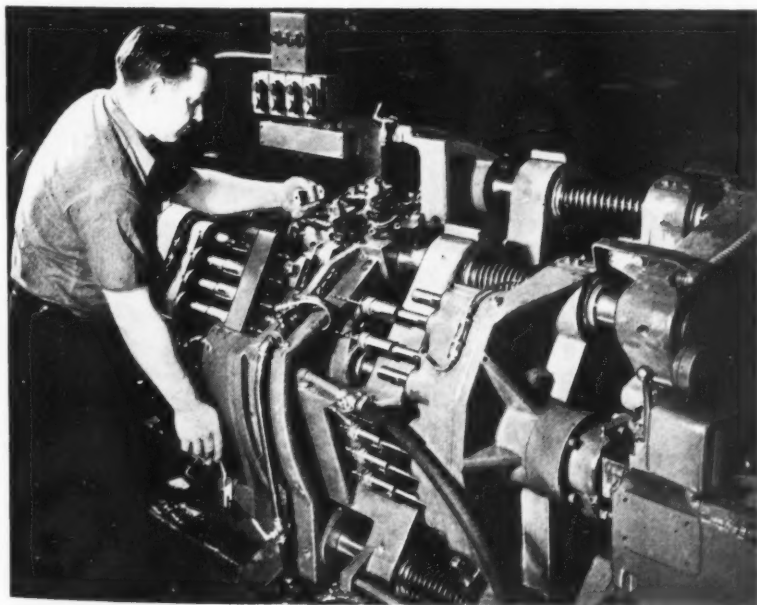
Double-end Hydraulic Machine which Drills, Reams, and Spot-faces the Bolt Holes of Connecting-rod Caps and Also Drills a Dowel Hole
